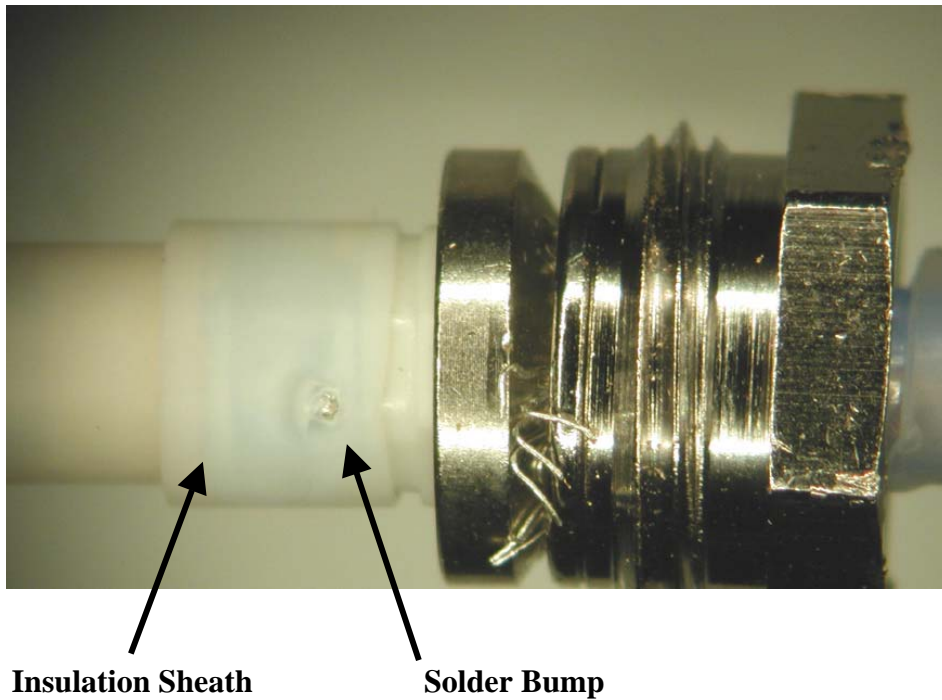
After connector disassembly, the same solder bump protruding through the insulation sheath.
